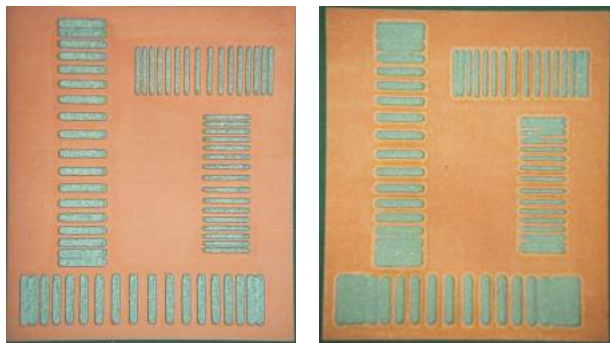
Slump Test a) Cold Slump b) Hot Slump
